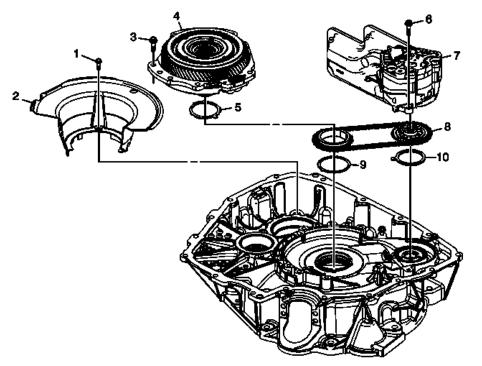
Identifying Fluid Trough Components Courtesy of GENERAL MOTORS COMPANY
